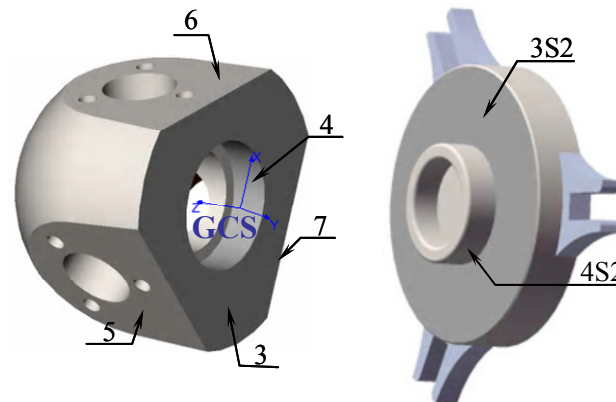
MWP/Fixture assembly with a floating link, “Bolt” example
